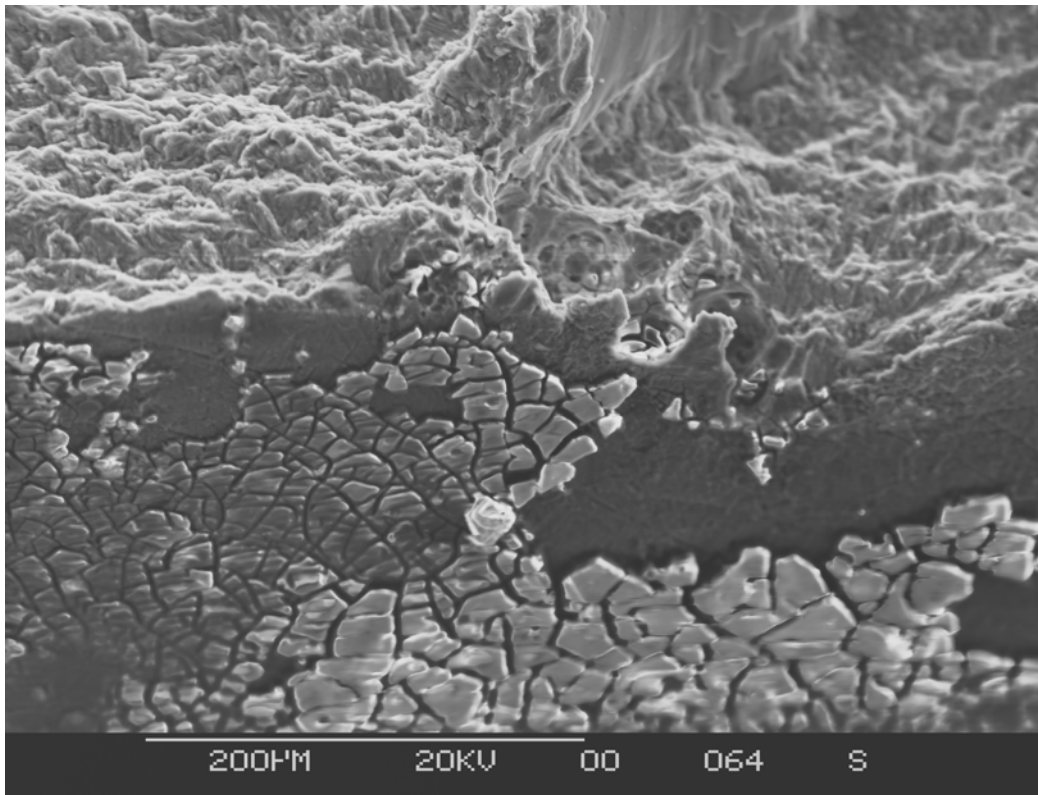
Surface View of Crack Origin A (Fig. B-3) on Specimen 1331.
